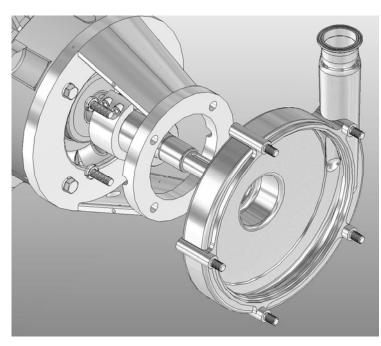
(345, 355, 1051 & 1161 MODEL PUMPS ONLY)
